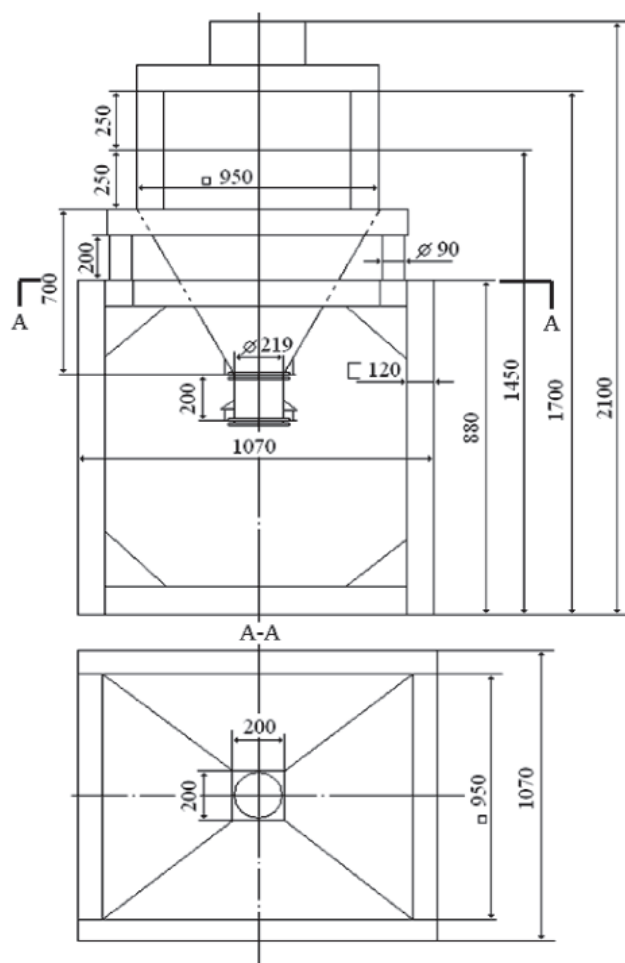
Dimensions of the industrial vibration milling unit performance of 1500 kg/hour
